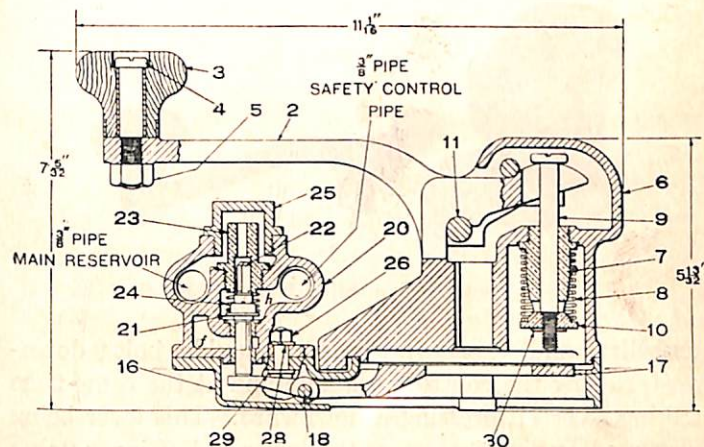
Controller Handle and Pilot Valve—Sectional View
